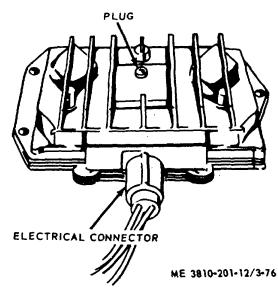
Alternator voltage regulator, adjustment , removal and installation.
